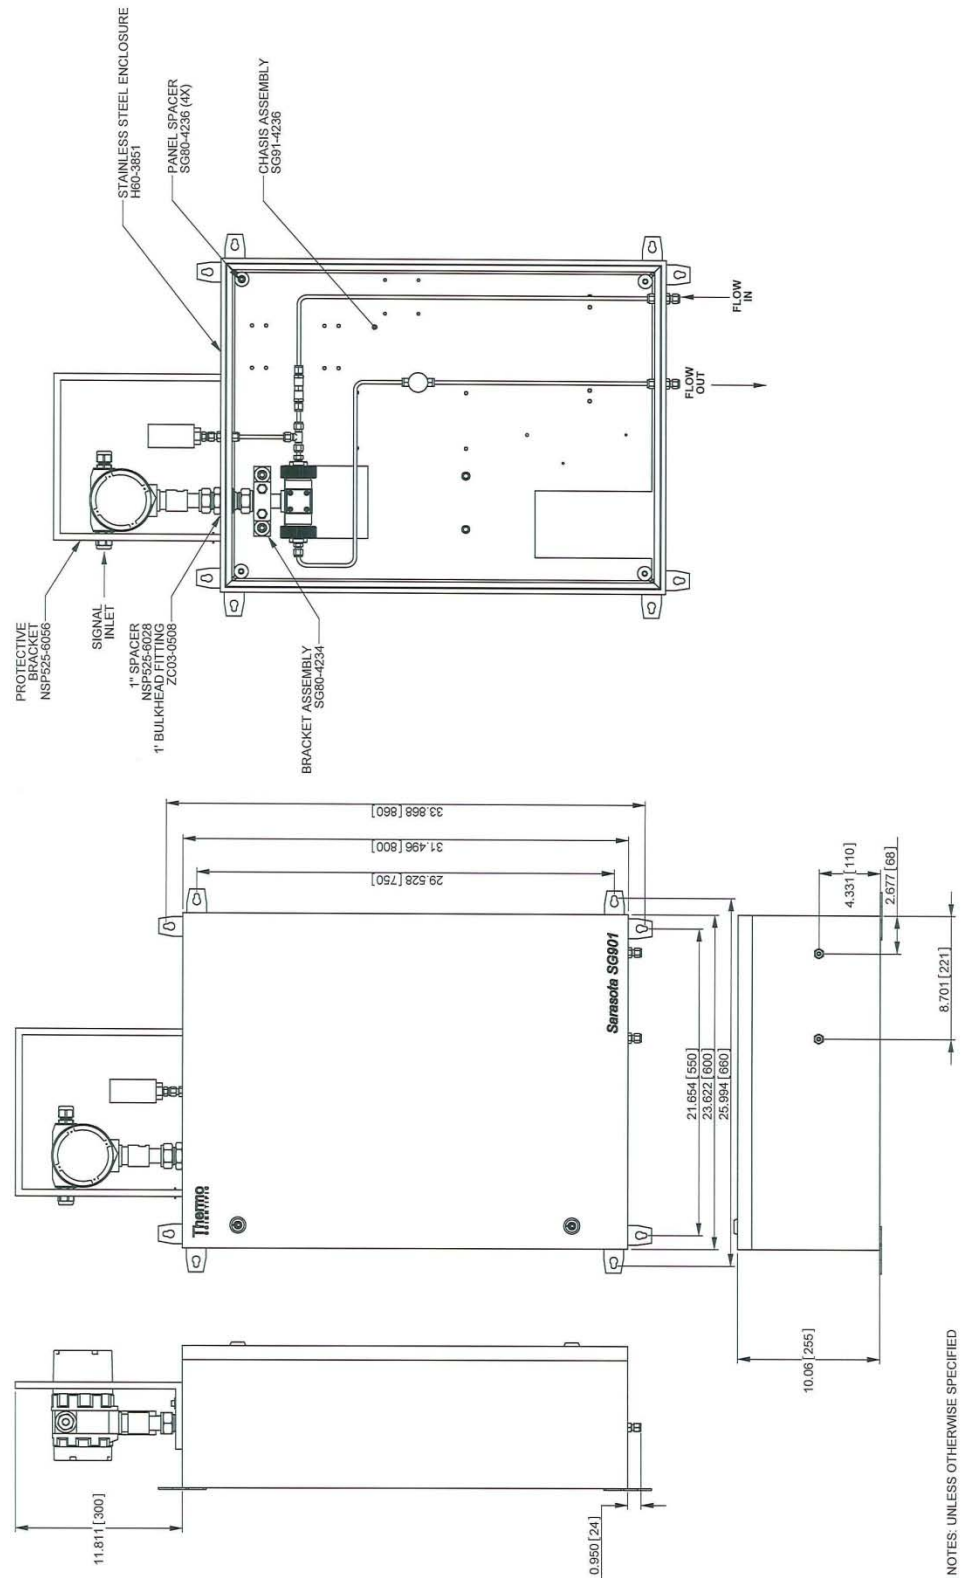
SG91-6004: General assembly drawing, HT dry gas system (sheet 1 of 3)
